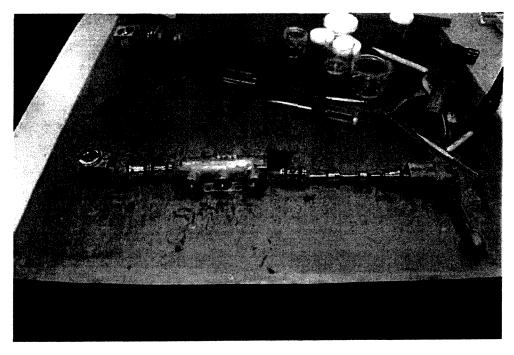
Disassembled Valve Removed from Trailer Unit 6778
